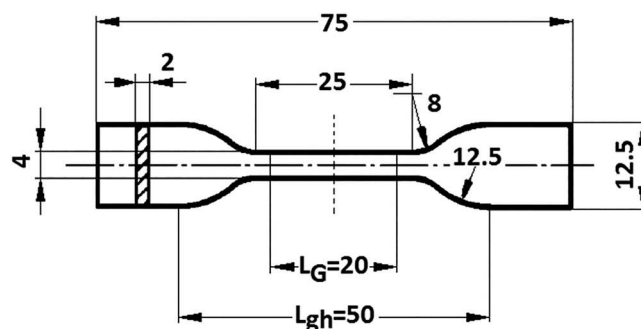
| Dimensions (mm) of the ISO 527/2-5A specimen.
